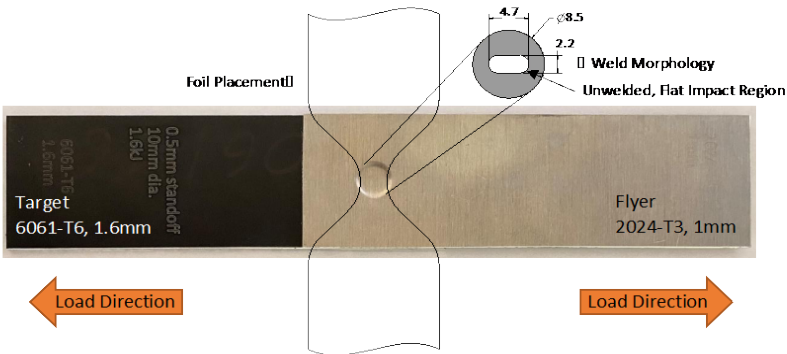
An example weld is shown with the foil orientation, typical weld morphology, and standard tensile test loading direction indicated. A dimple is left in the flyer sheet at the weld site. This dimple takes on the approximate shape of the machined standoff cut in the target sheet.
